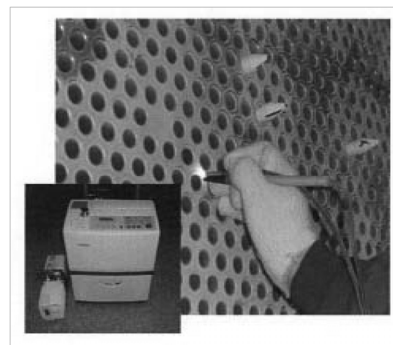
Helium Leak Test on Tubesheet Seal Weld Region
